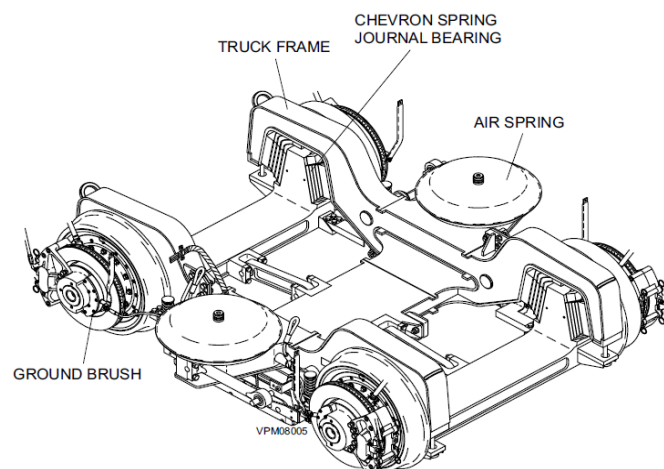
Center Truck Assembly – Courtesy of Santa Clara VTA LRV
